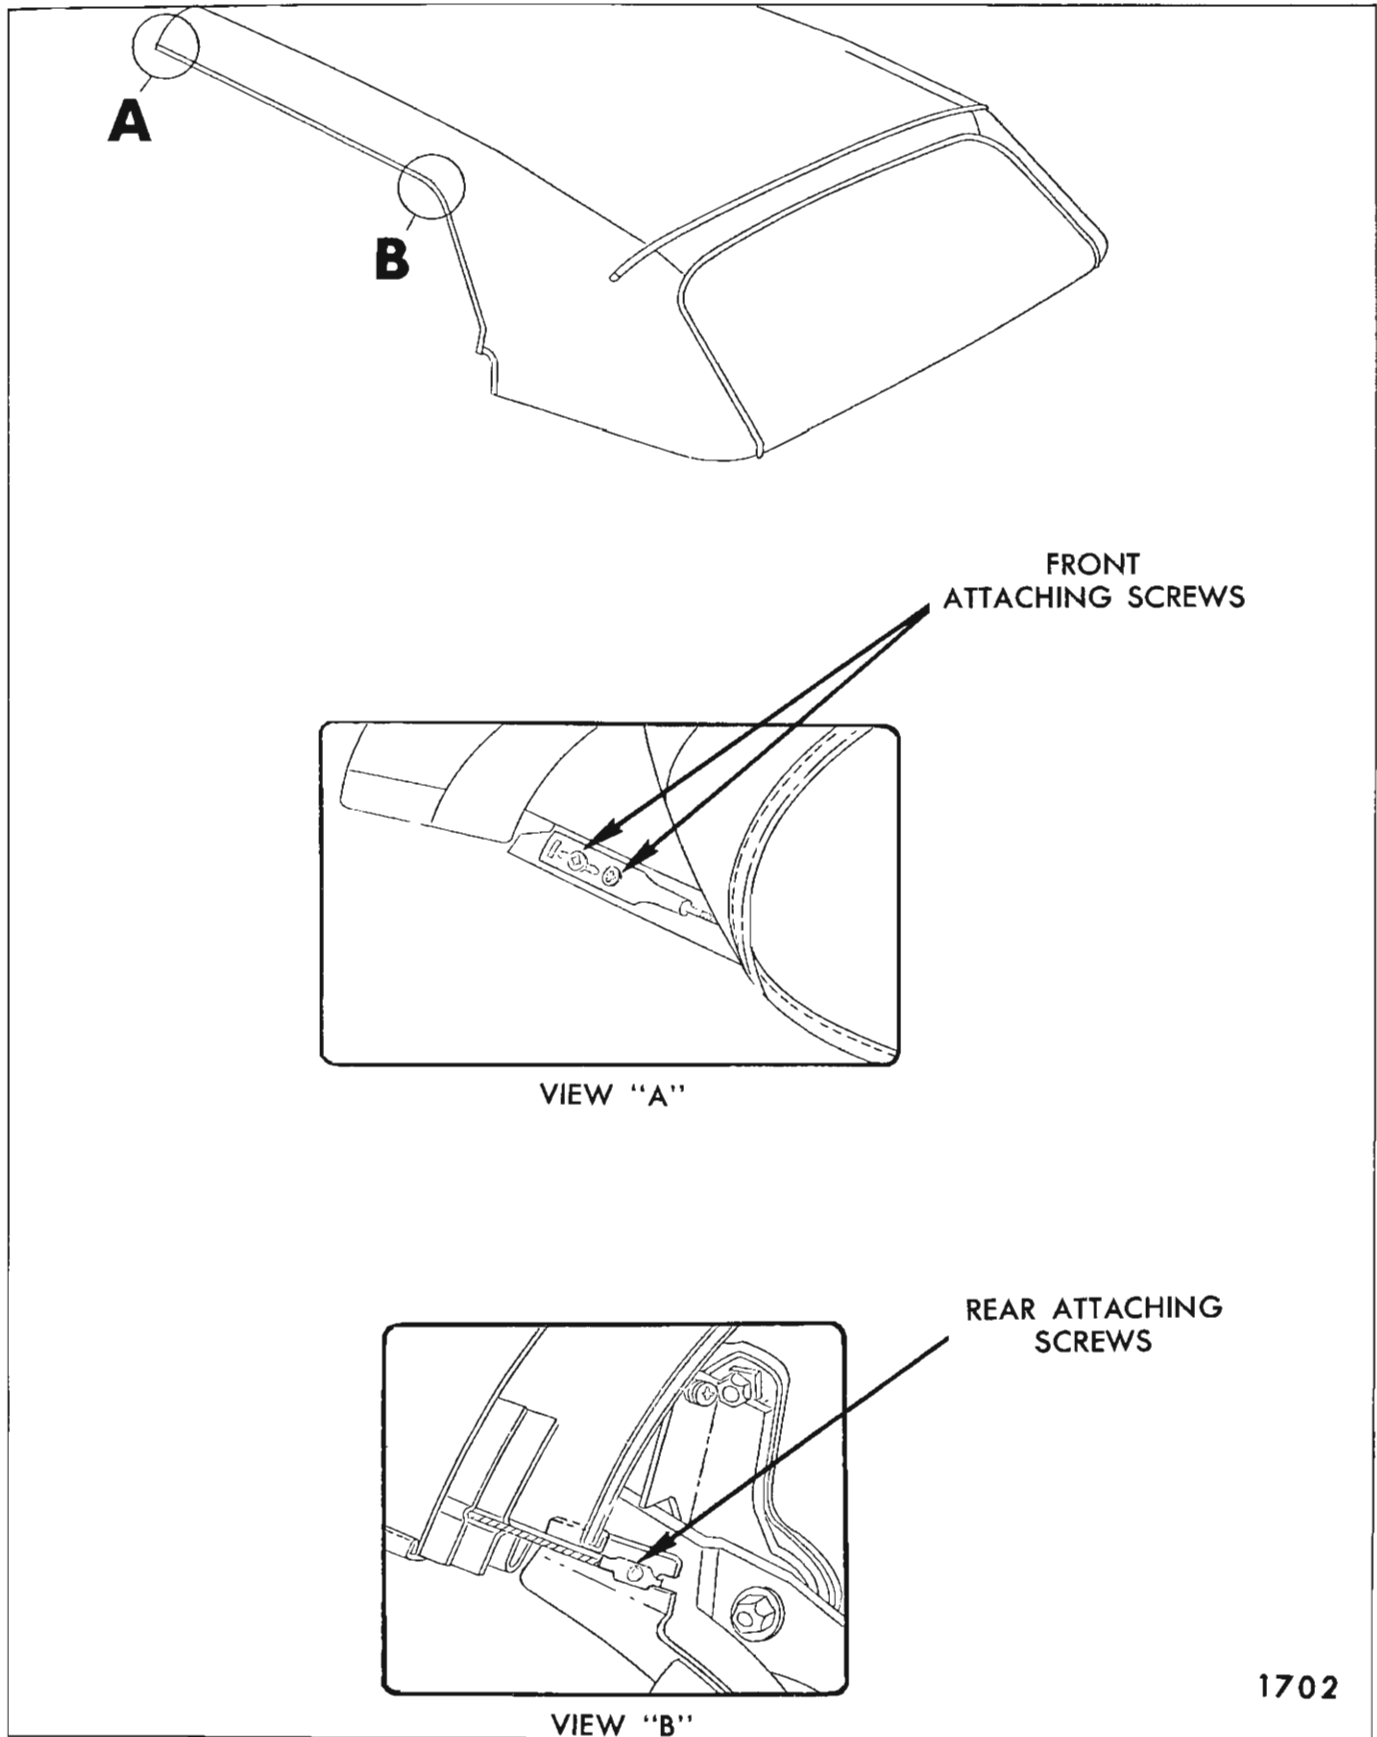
Hold-Down Cable Attaching Screws
